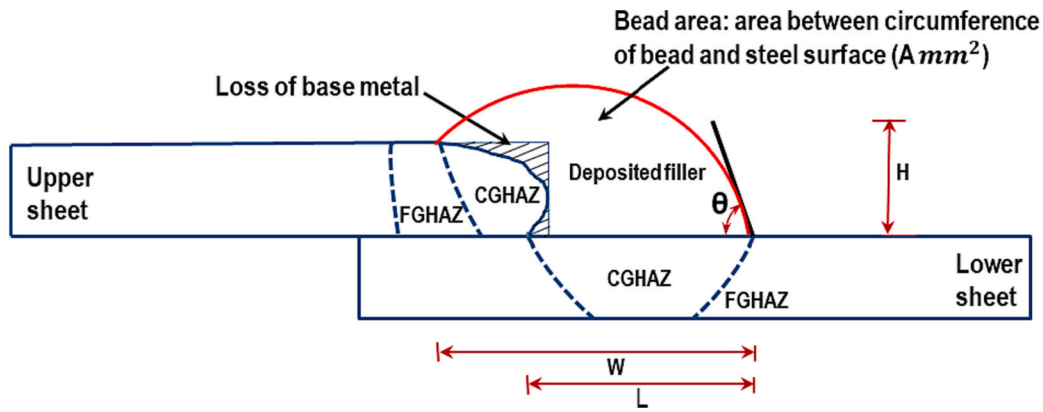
Schematic representation of cross-section of steel-steel brazed/weld-brazed lap joint [68].
